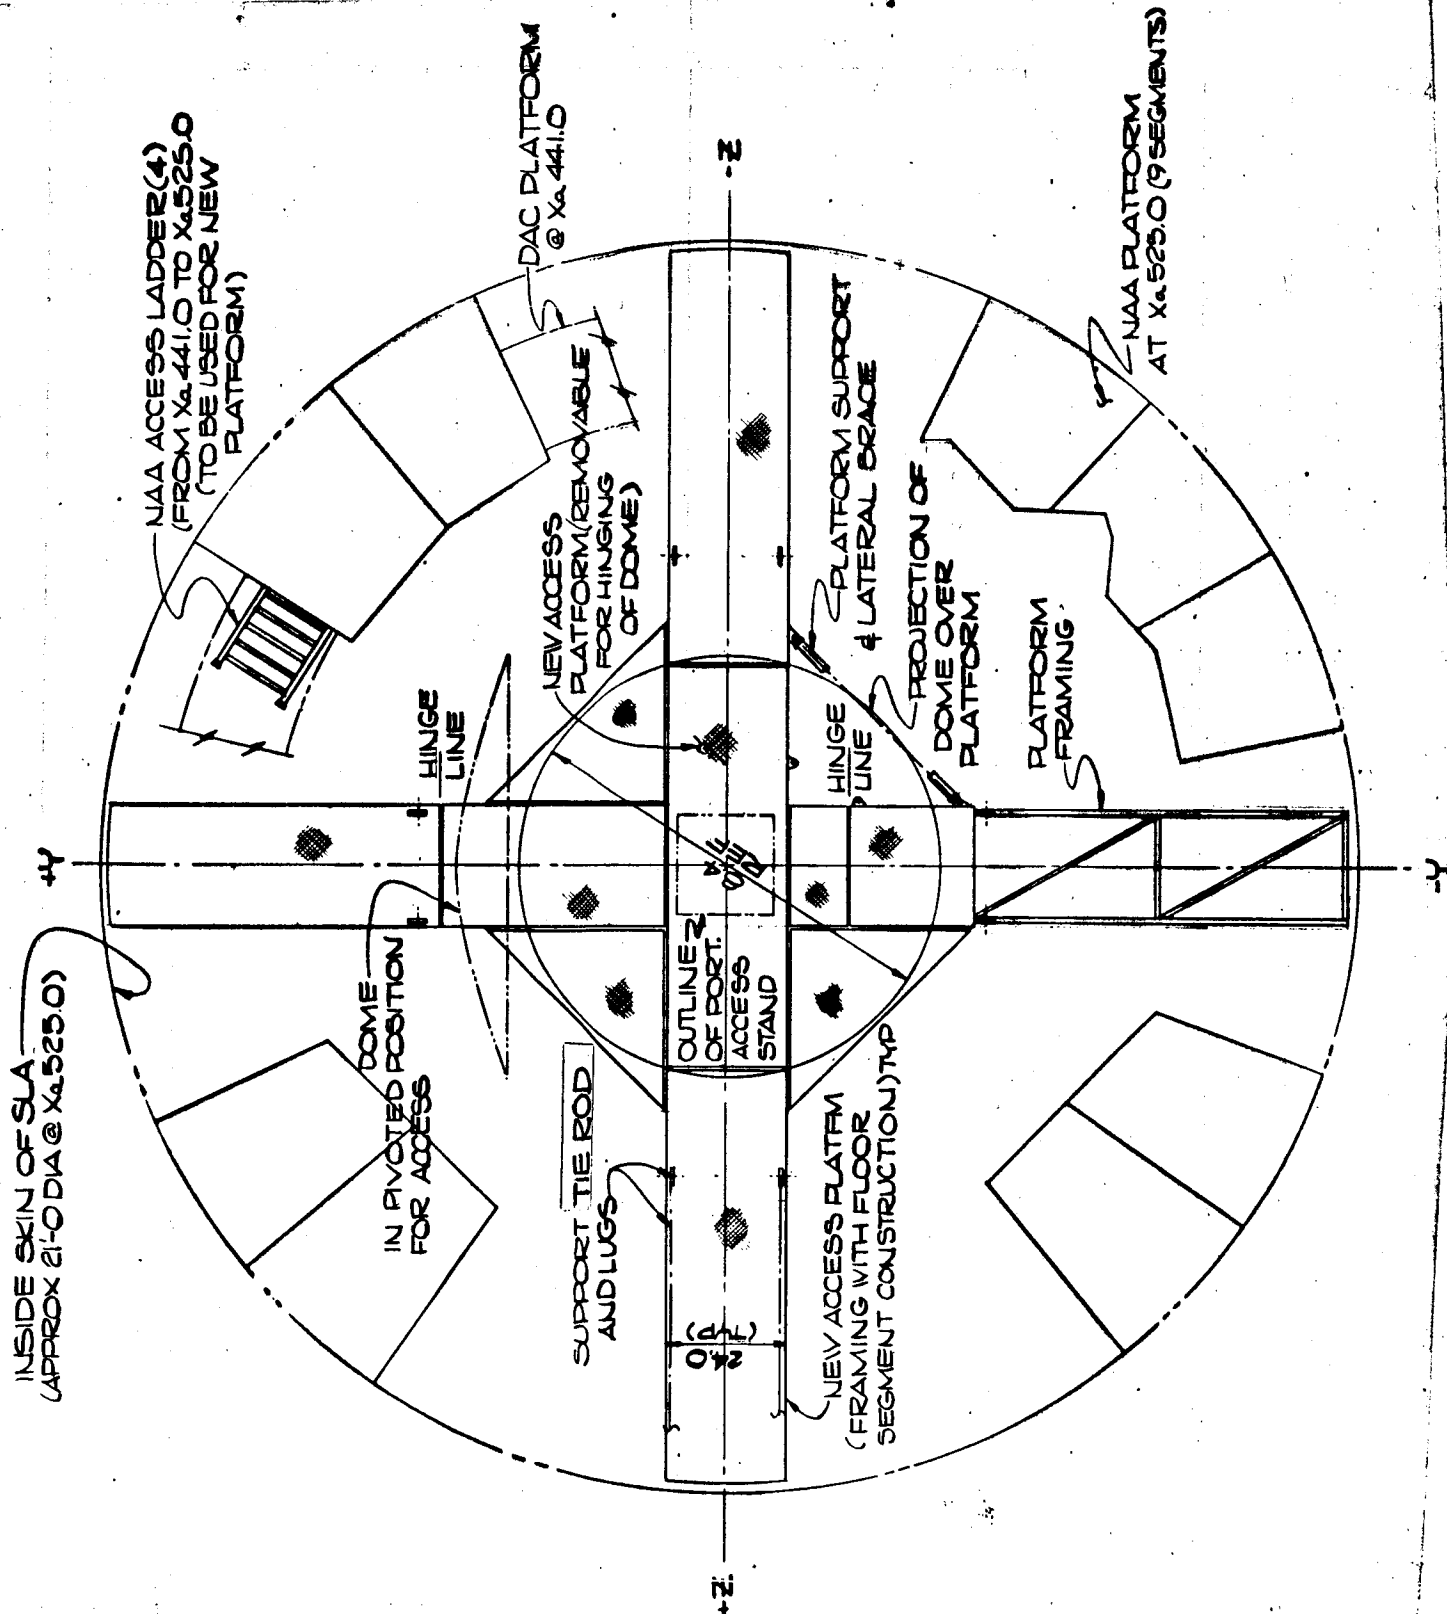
SLA Internal Access - Plan View, Level X_A 525
